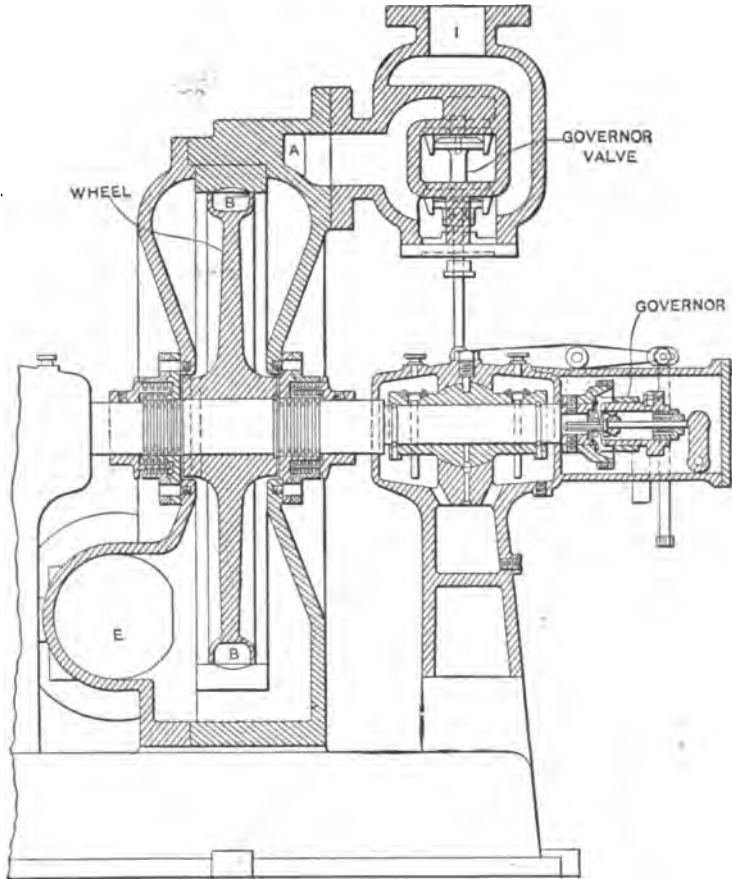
Sturtevant Steam Turbine Driving a Gas Blower
